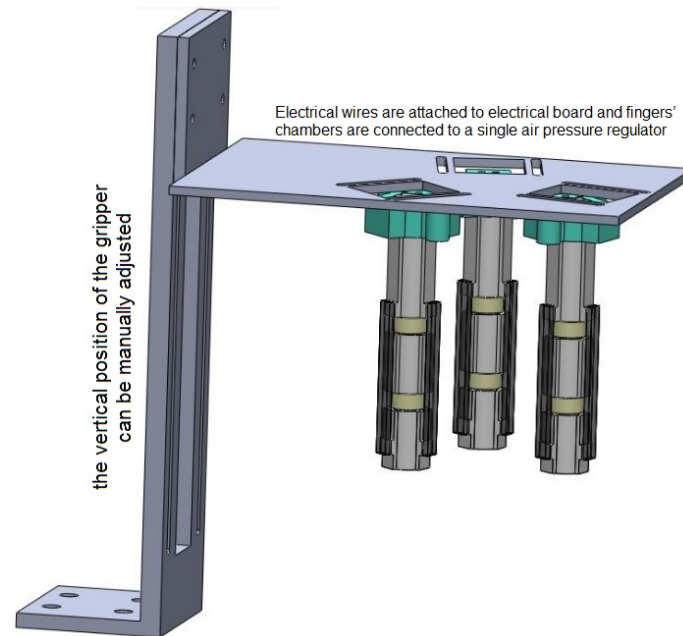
The schematic of the soft gripper with three fingers attached to an L-shaped fixture.
